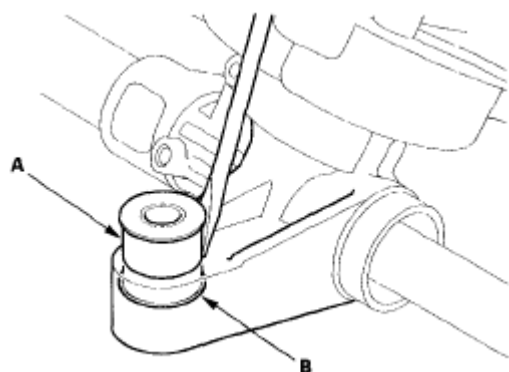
Identifying Water Solution To Gearbox Mount Cushion Surface
